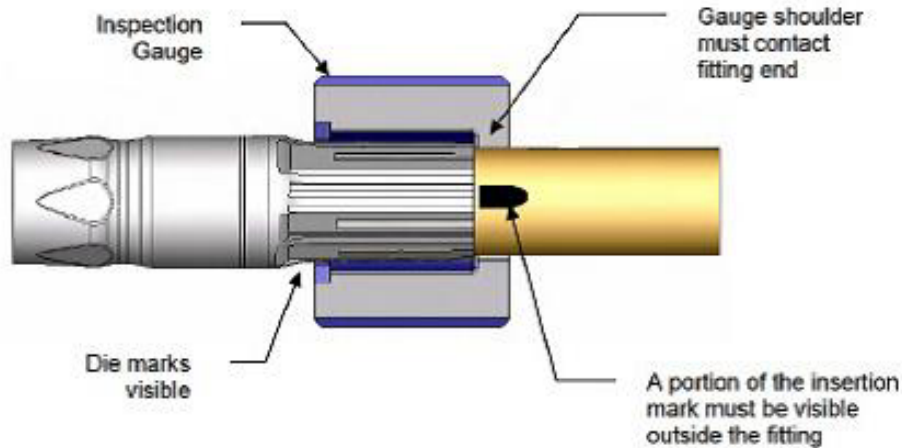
Go/no-go gauge inspection criteria.
